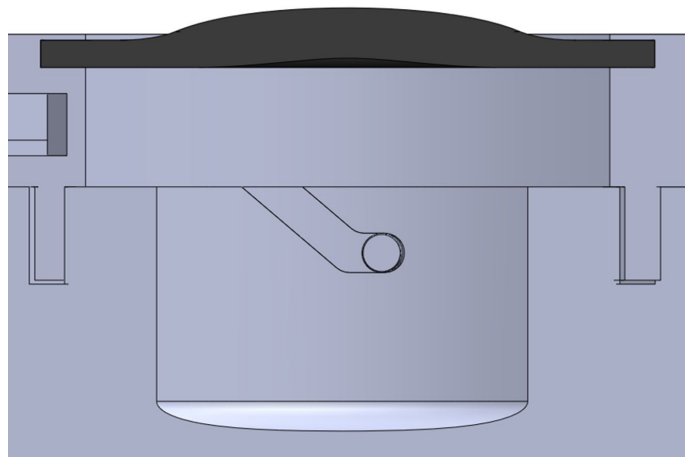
Angled Slots for Improved Top and Bottom Assembly Connection
